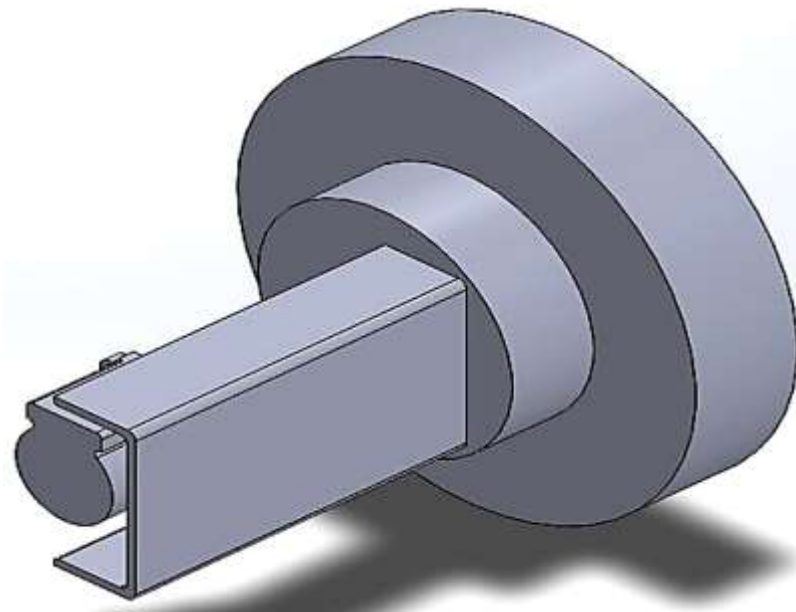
Pictorial Drawing of the Final DFH₂ Speedometer System (Front View)
